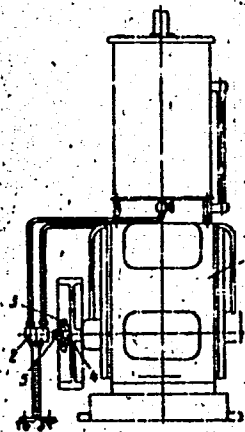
1- pump; 2- valve; 3- centrifugal governor; 4- pump shaft;
